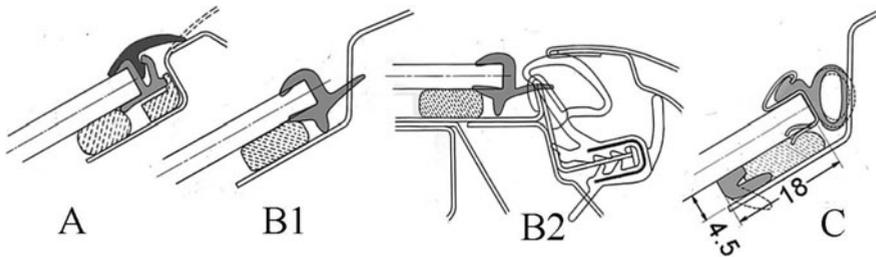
Examples of weather strips for bonded windshield. A: with rubber constant section snap-on molding; B1, B2: single strip with centering lip (upper and side sections); C: bulb strip with metal molding.
